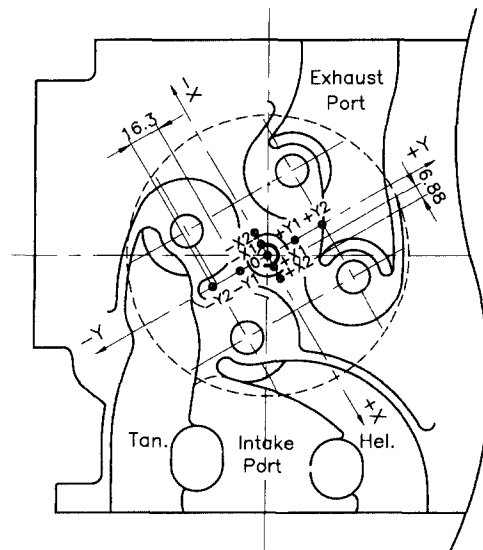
Geometry of a 4-valve cylinder head and the positions of two intake ports
